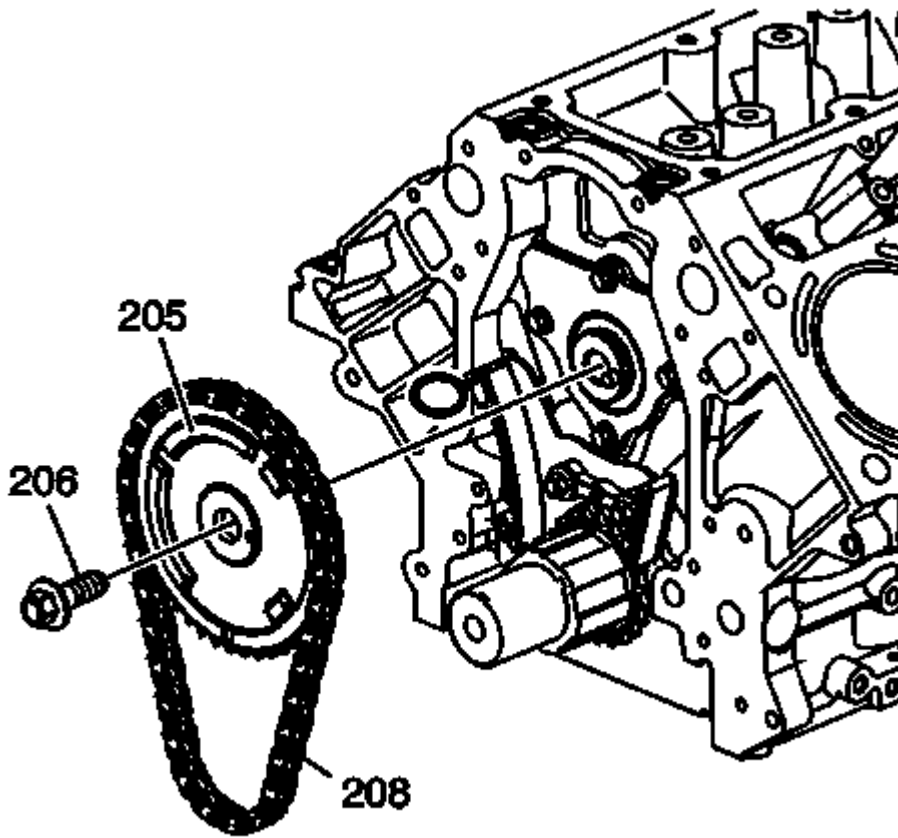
View Of Camshaft Sprocket & Timing Chain
